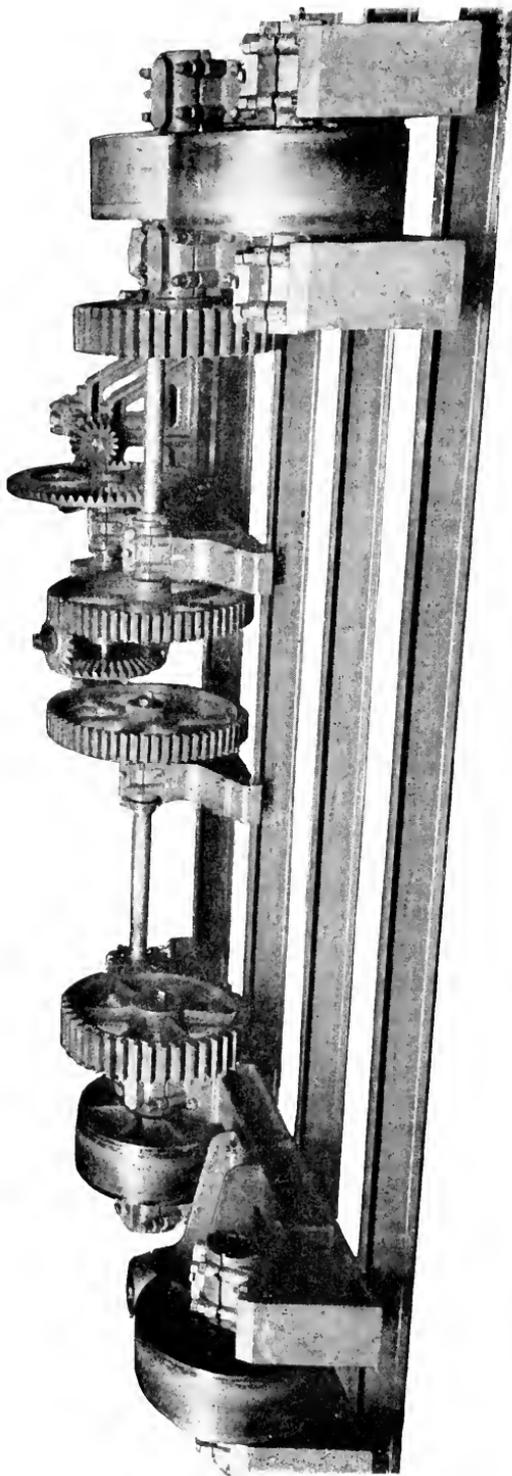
A.—COMPENSATING GEAR OF THE ARGALL ROASTER.
